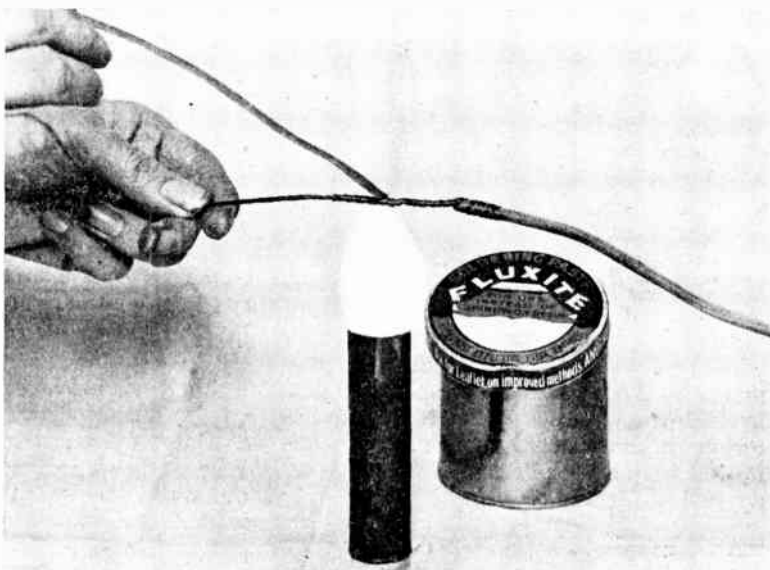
SOLDERING A LEAD-IN WIRE.
